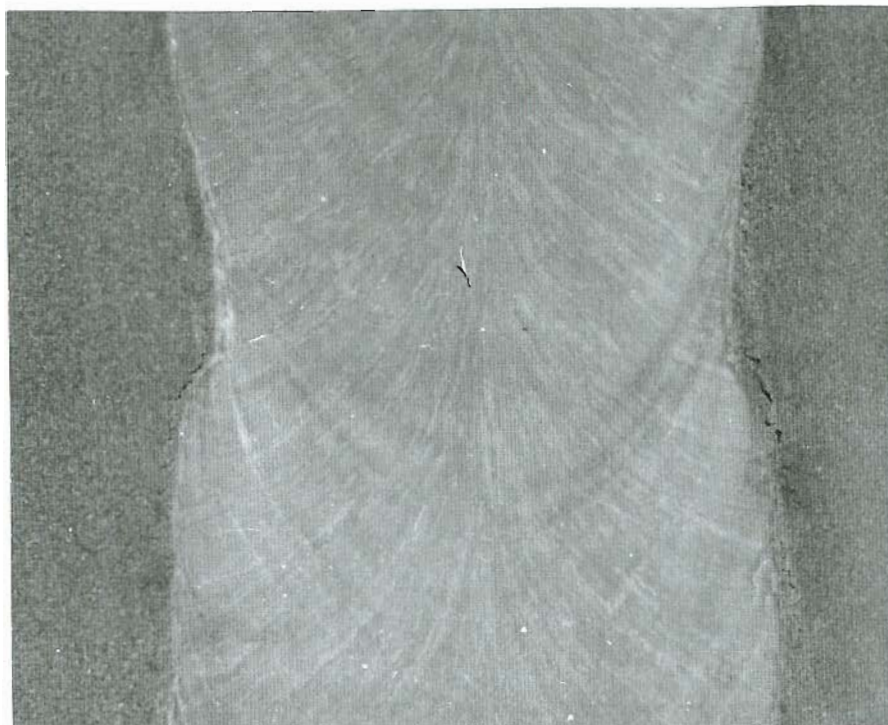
MACROSECTION OF A TYPICAL THERMIT WELD.
